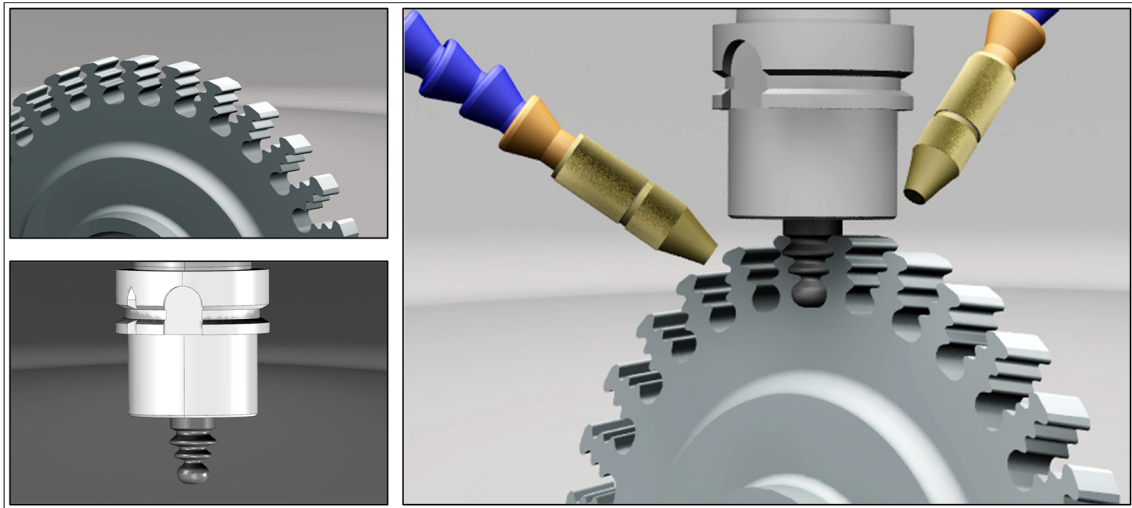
Super Abrasive Machining (SAM) applied for fir trees manufacturing.
